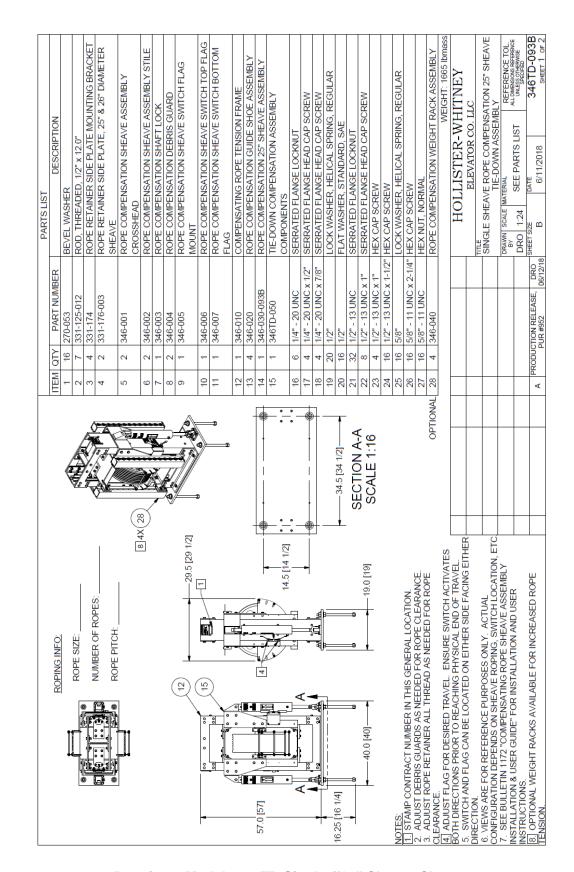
Model #346 Single Ø25" Sheave Sheet-1	a
